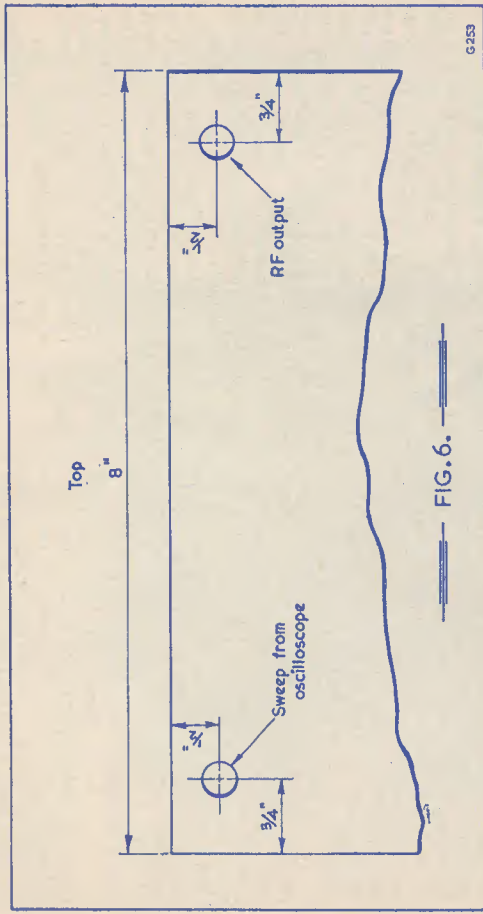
Showing the top rear surface of the cabinet, together with the positioning of the coaxial socket centres
